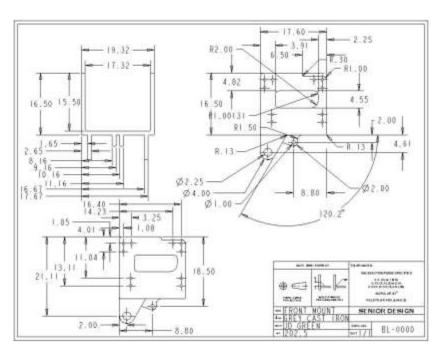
Drawing of large mount that holds hydraulic cylinder and front pivot pin in place.
